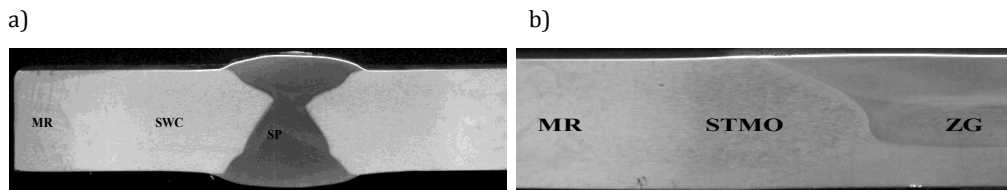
A cross-section of a welded joint: a) bonded joint; b) 7020 alloy with visible elements of the binder — SP (the weld — ZG), the heat affected zone — SWC (the thermo-mechanical treatment zone — STMO) and the area of the host material — MR (joined) [8]
